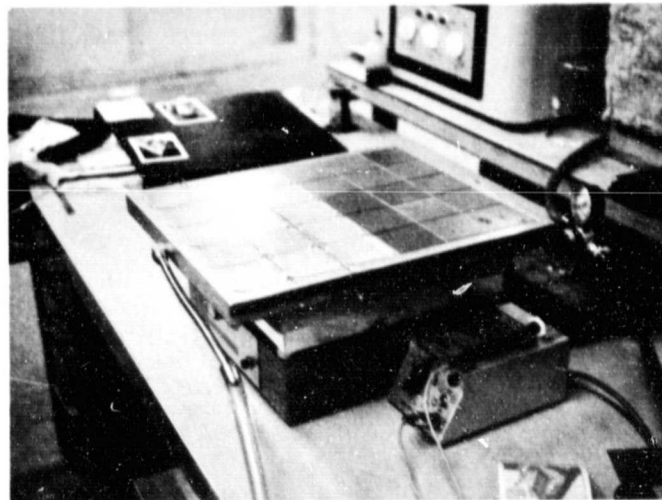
Vacuum Chuck with 3×5 Cell Matrix (Side View)
